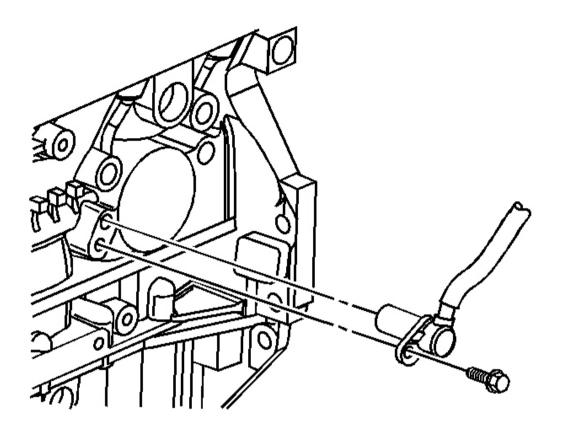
View Of Crankshaft Position (CKP) Sensor Courtesy of GENERAL MOTORS CORP.
